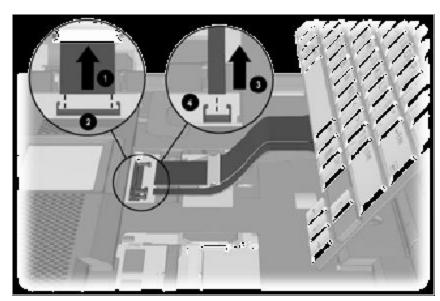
Releasing and Disconnecting the Keyboard Cables
